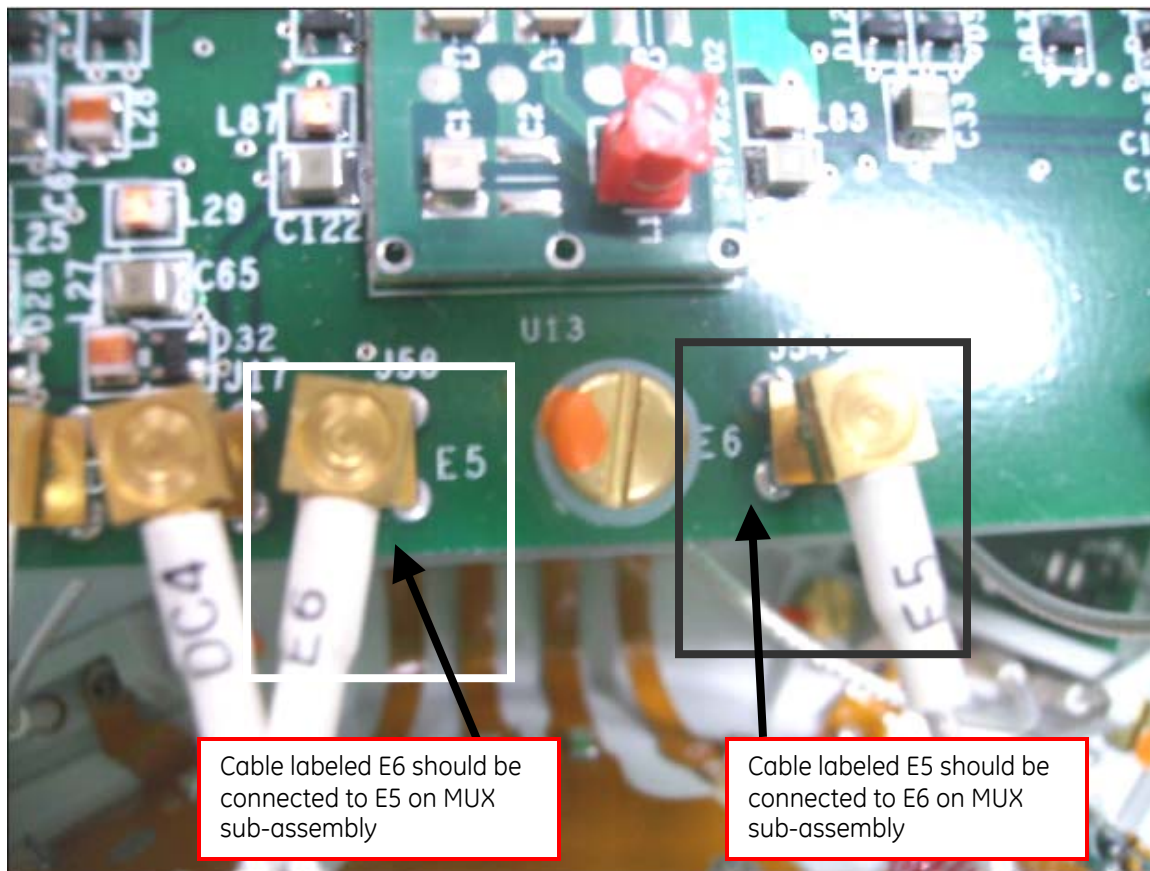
The cable labeled E6 should be connected to E5 on MUX sub-assembly, and the cable labeled E5 should be connected to E6 on MUX sub-assembly
